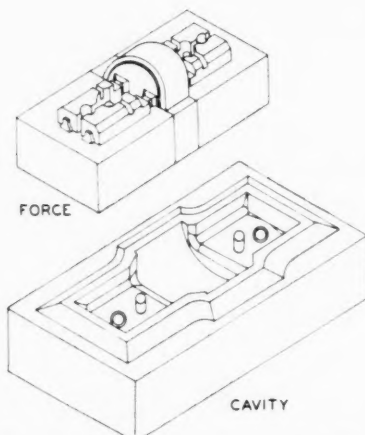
Drawing of Cord Connector Plug Mold; Both Halves of the Mold Are Used in One Cavity
